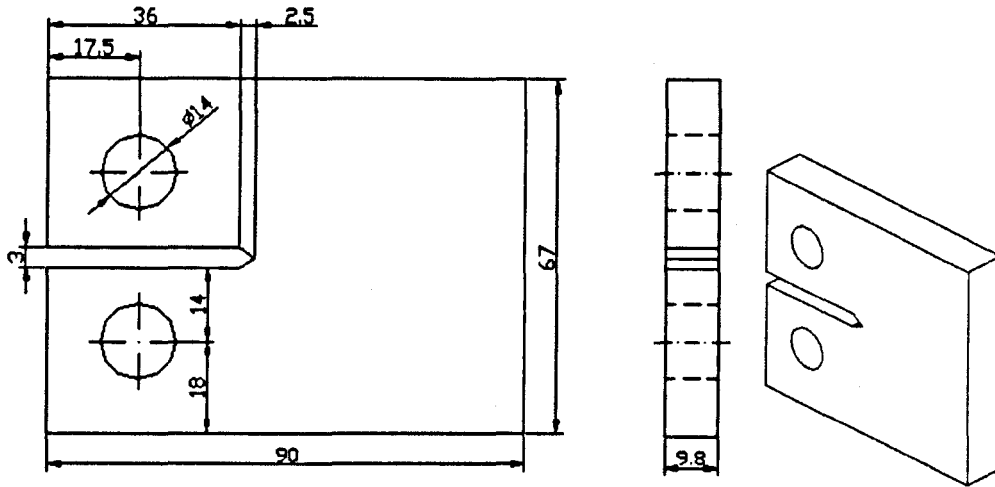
Left and centre: Geometry details of the 2024 aluminium alloy WOL specimen, utilized for mode I analysis. Dimensions are in millimetres. Right: Three dimensional view of the specimen.
